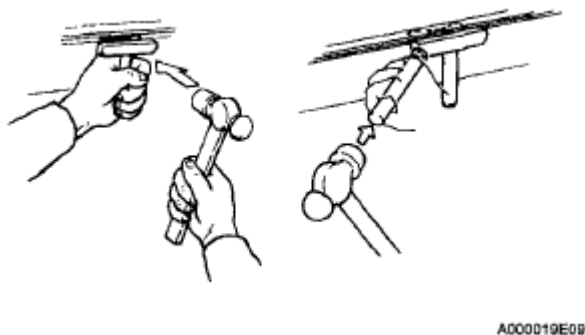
Inserting Blade Of Oil Pan Seal Cutter Between Crankcase, Chain Cover And Oil Pan
